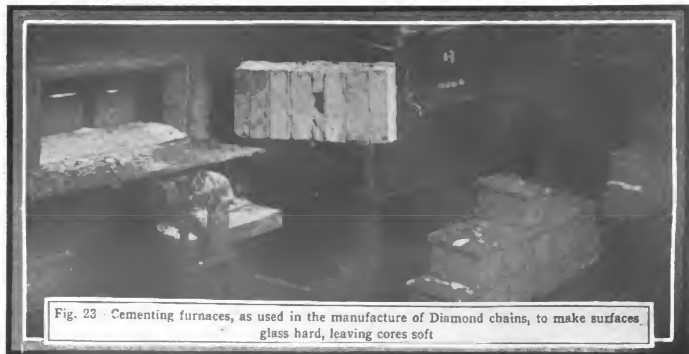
Cementing furnaces, as used in the manufacture of Diamond chains, to make surfaces glass hard, leaving cores soft
